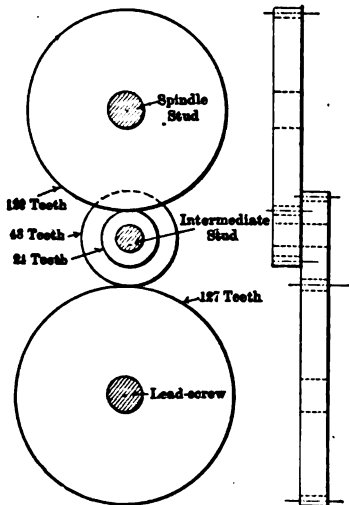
Example of Gearing for Cutting Metric Thread with English Lead-Screw.
